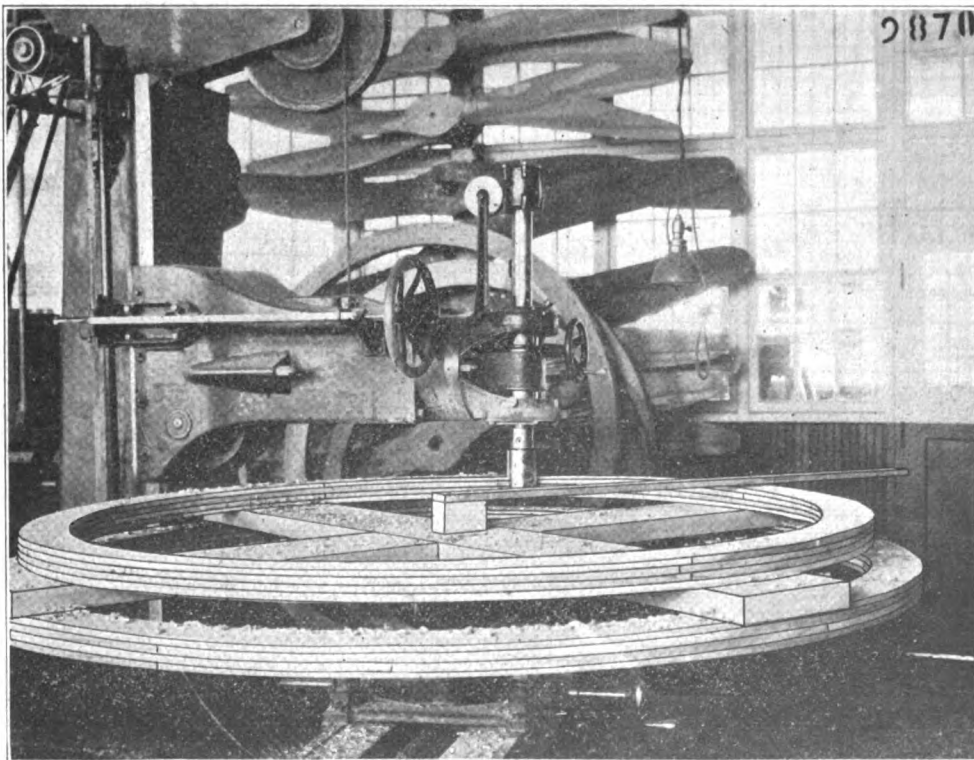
Turning large wind tunnel rings on Oliver woodworking machine.
